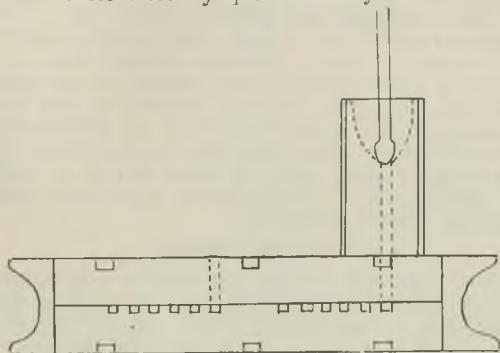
SECTION OF THE MOULD SHOWN IN FIG. 1.
